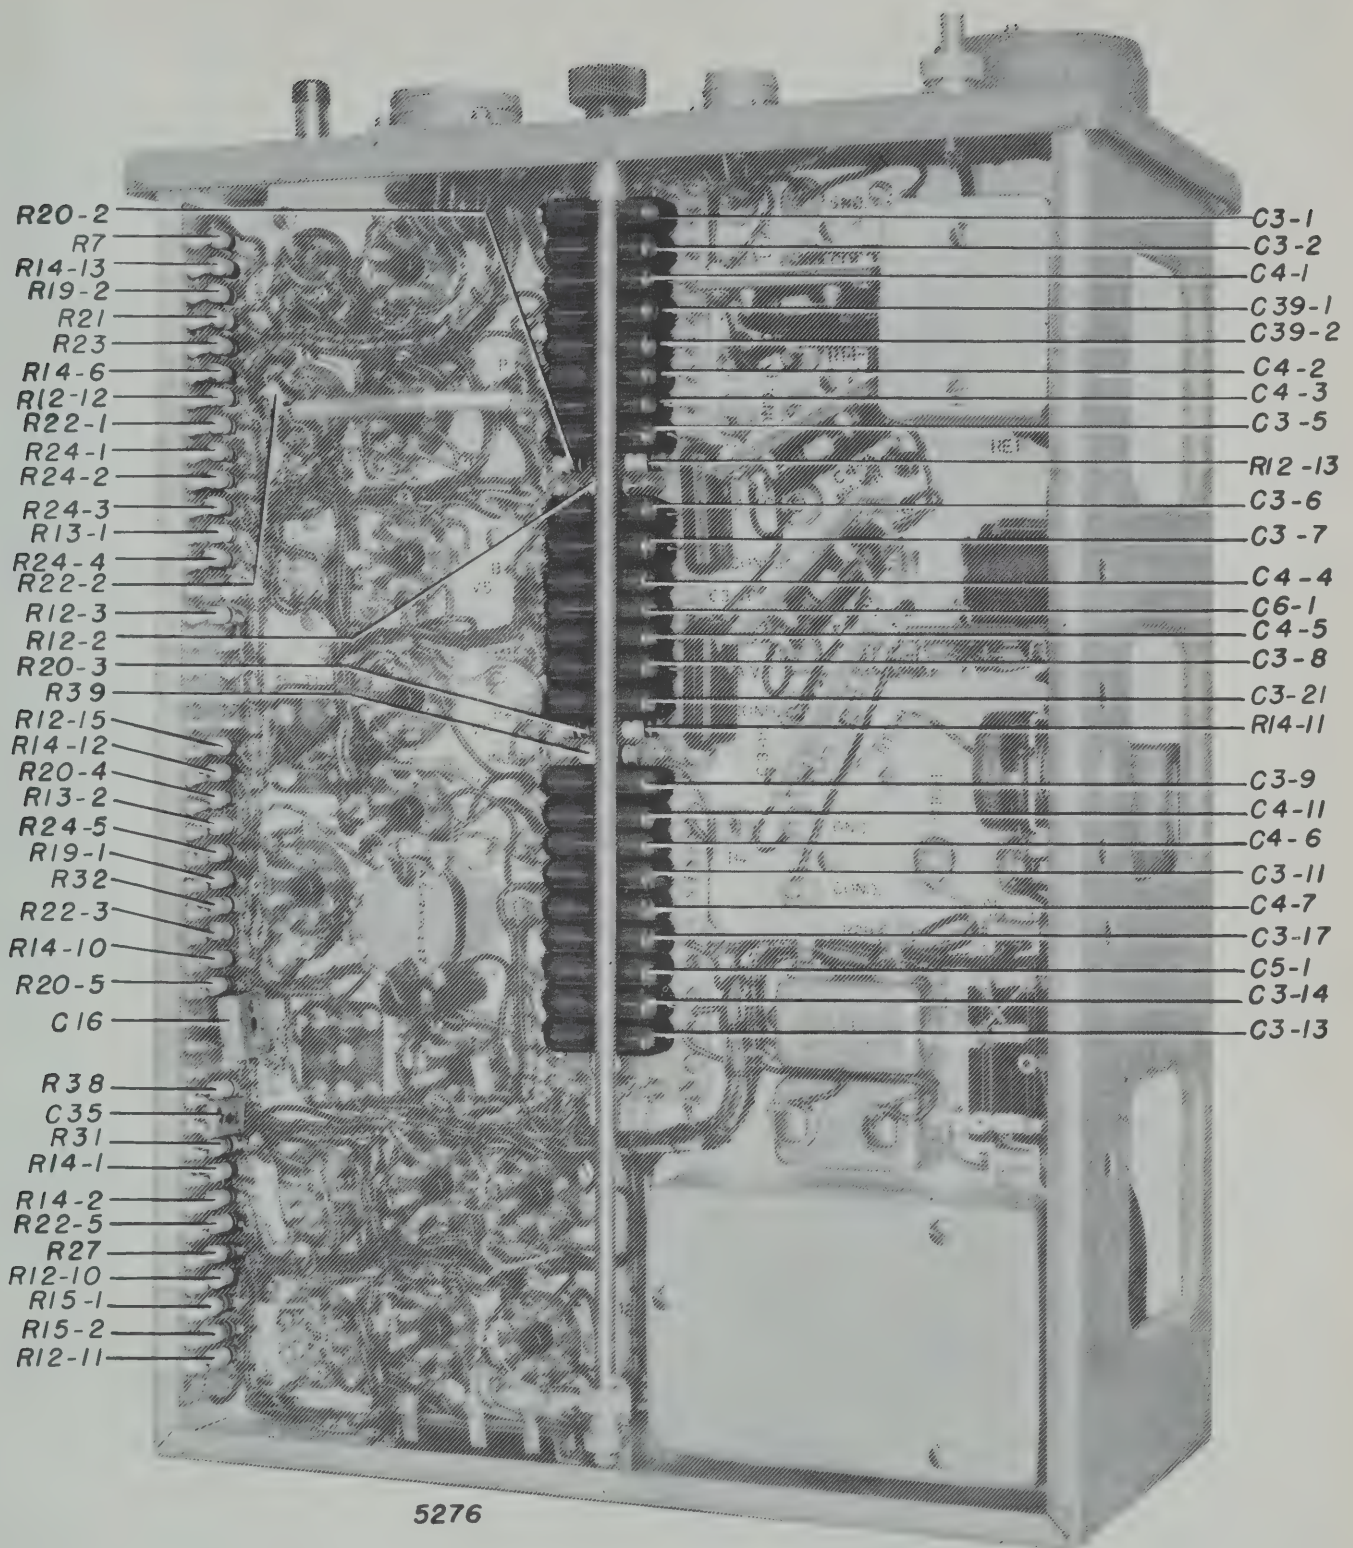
TYPE MN-26 RADIO COMPASS, RIGHT BOTTOM VIEW OF CHASSIS
